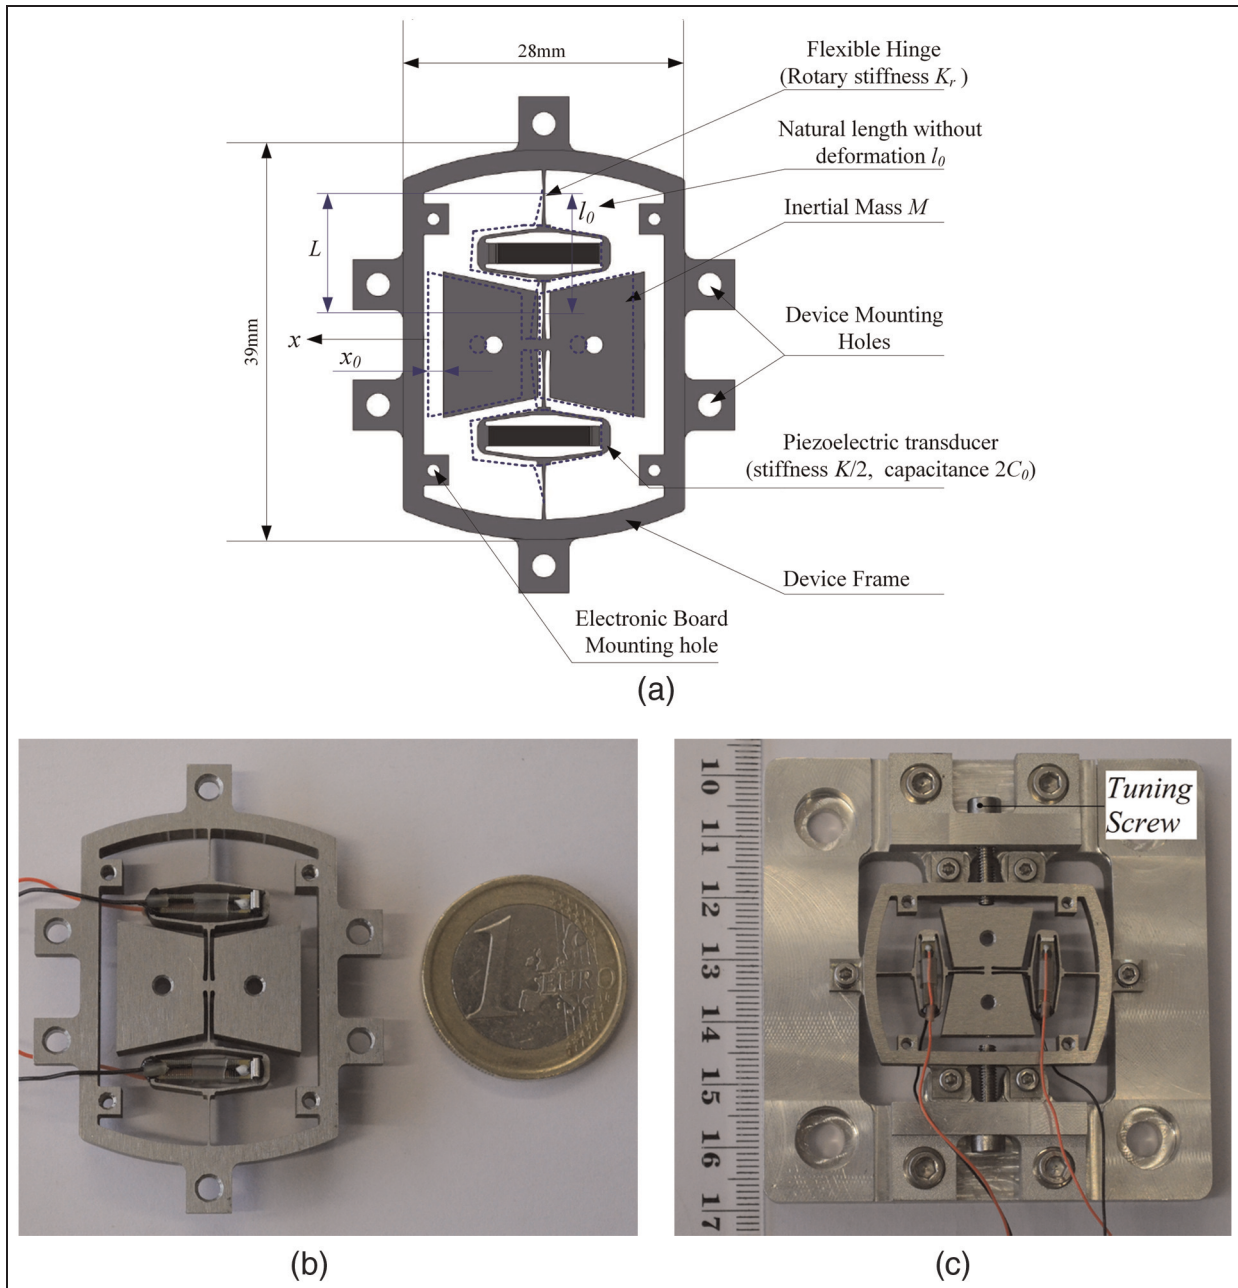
(a) Schematic of the MBM bistable generator, (b) fabricated generator, and (c) assembly platform for initial buckling position tuning and clamping. MBM: mono-block miniaturized.
